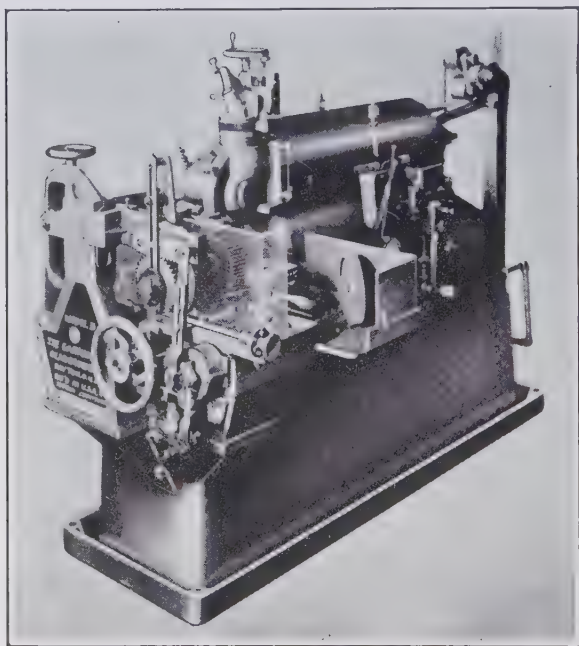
Garrison gear grinder employing a cone-shaped wheel carried on a ram.
